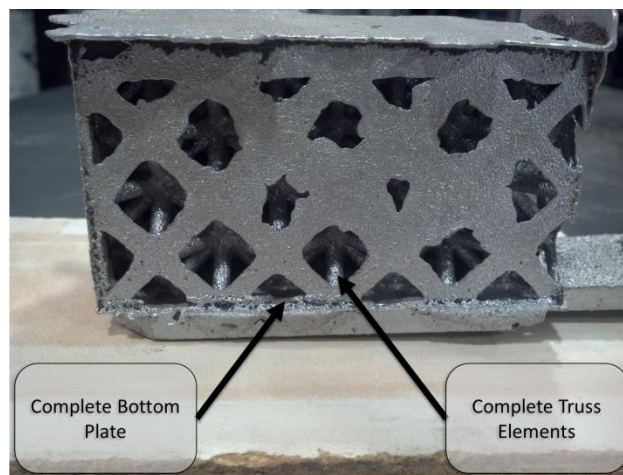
Defective Casting Produced Using Manufacturer Recommended Curing Cycle (204°C for 8 hours)
